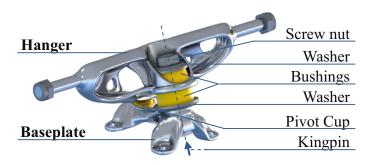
Assembly of the featured component with the final exhibit manufactured using selective laser sintering
